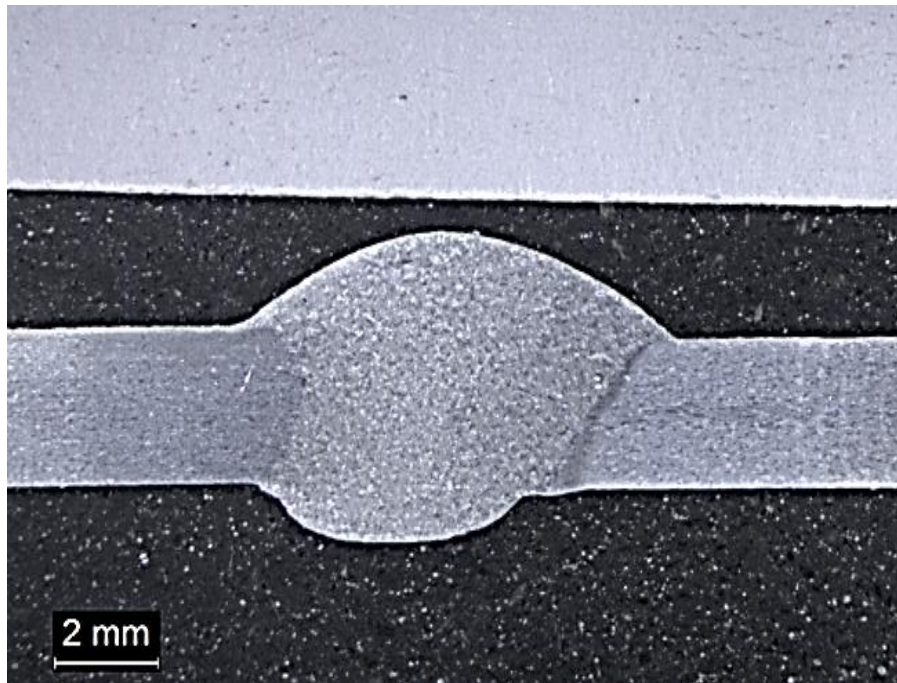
Macrostructure of transverse section of the CMT welded A6061-T6 and A6082-T6 joint using ER5356 filler wire
